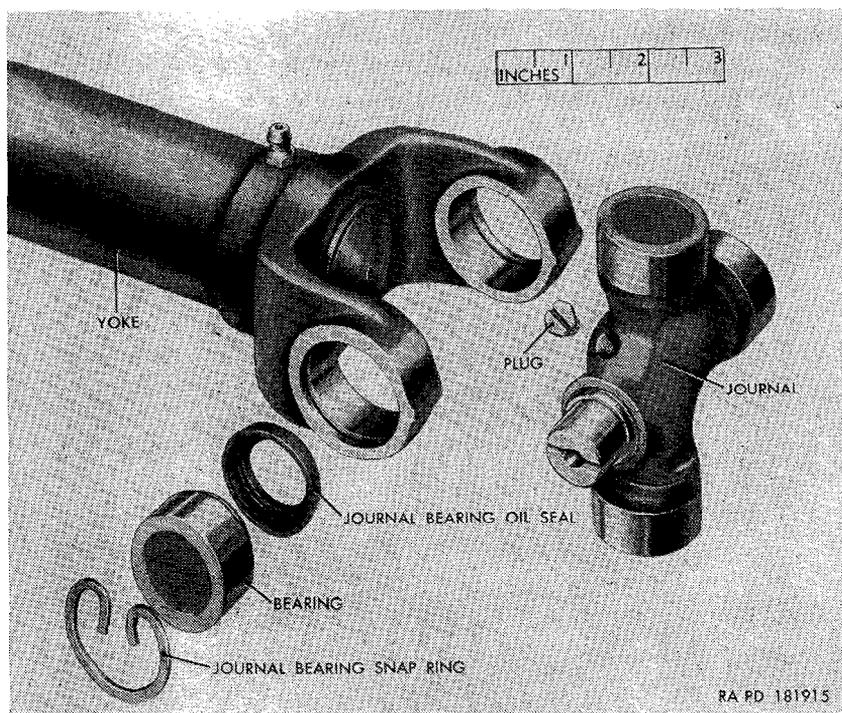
Front propeller shaft universal joint and yoke—partially exploded view.
